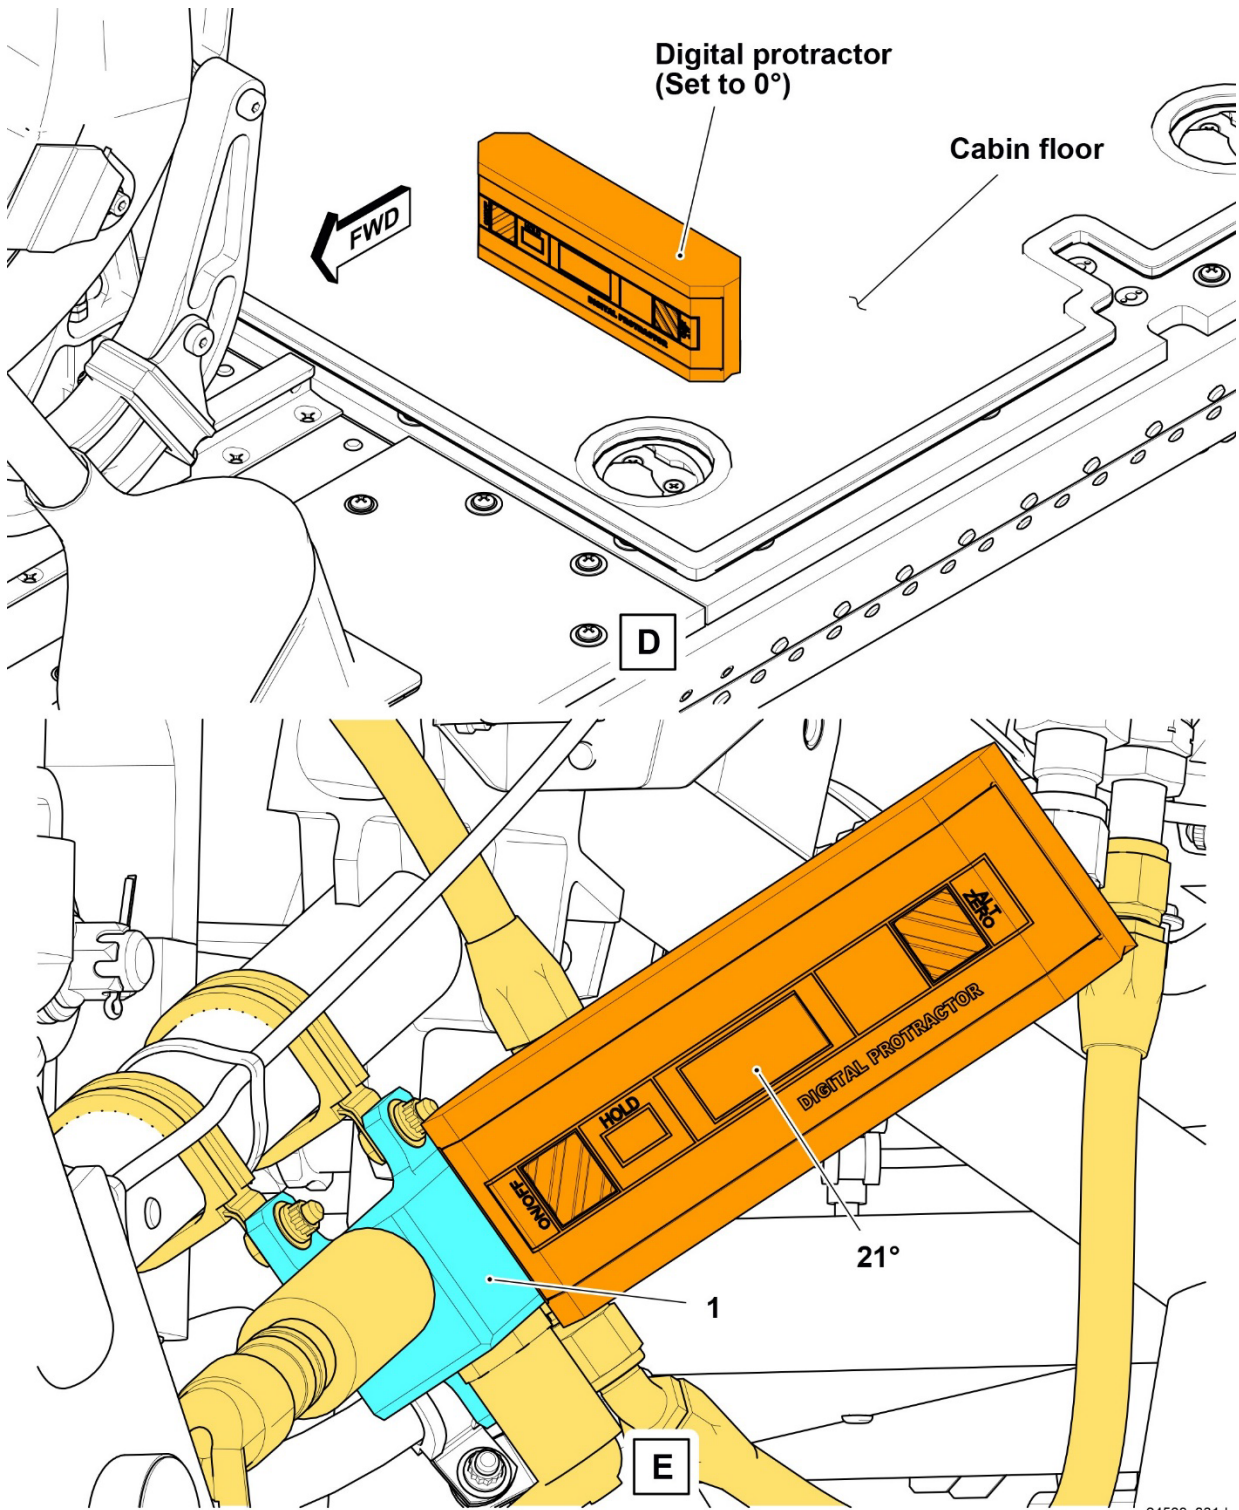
Typical Transmission Oil Manifold Assembly Installation
